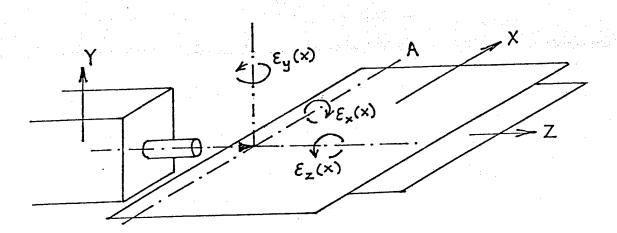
Horizontal boring mill: axis and rotational motion nomenclature.
